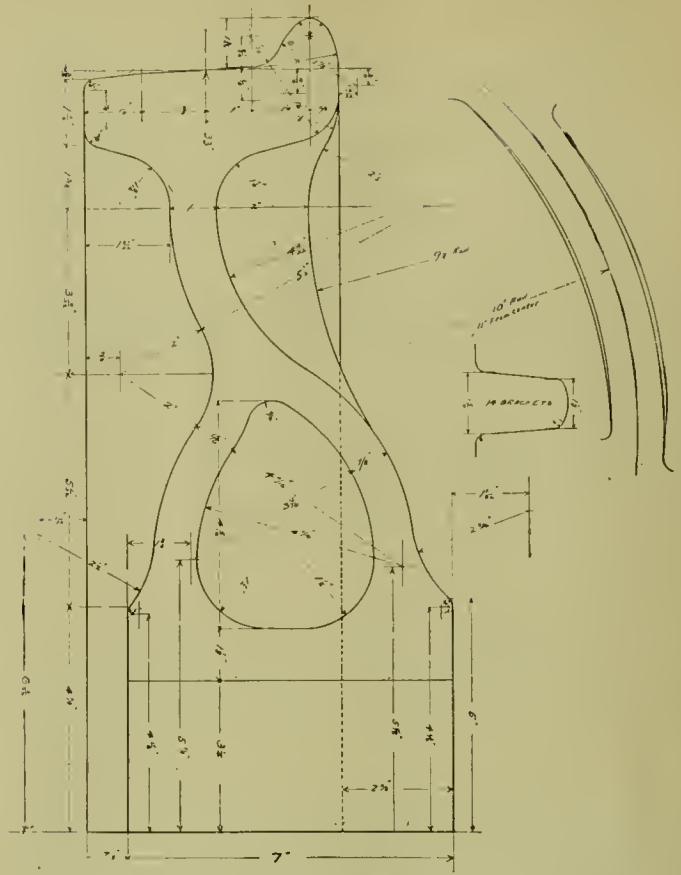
33 IN. 650-LB. CAST IRON WHEEL FOR 80,000-LB. CARS.
